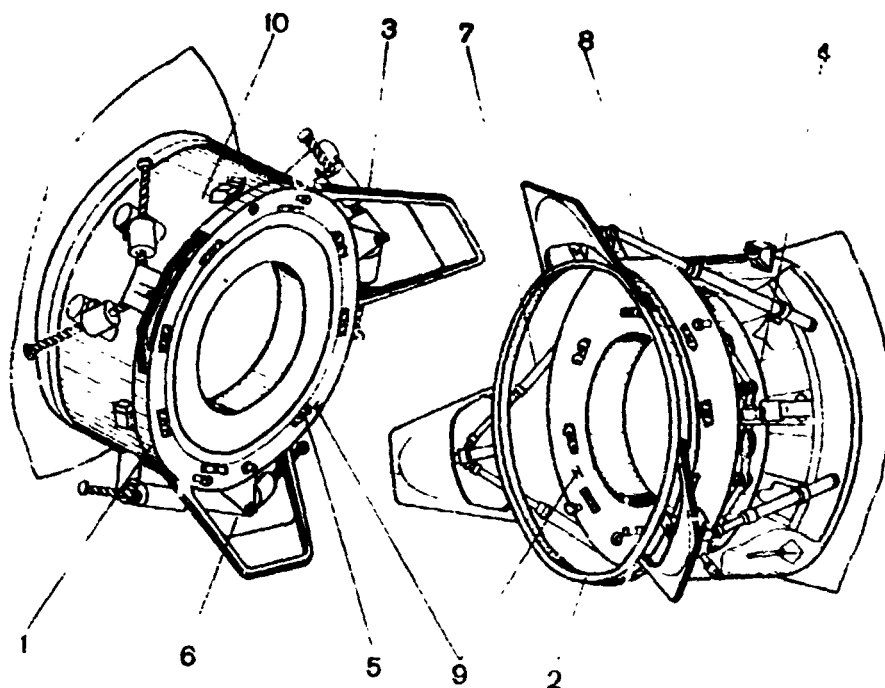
Simplified sketch of androgynous docking device, developed for joint Soyuz-Apollo flight program: 1--ring of passive craft (retracted); 2--ring of active craft (extended); 3--guide projections; 4--docking frame; 5--docking frame catches; 6--ring catch; 7--ring securing rods; 8--shock absorbers; 9--docking planes; 10--catches on housing.
